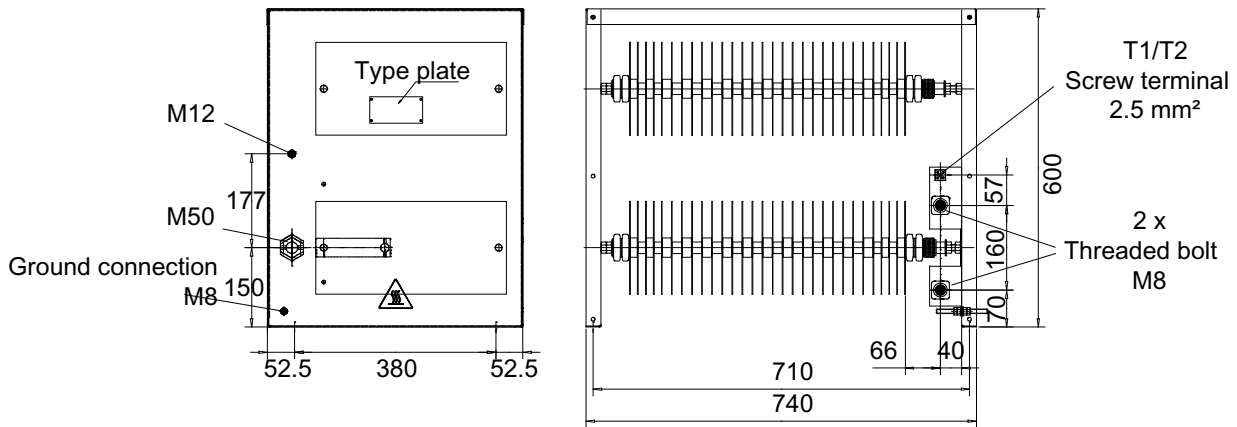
Dimension drawing for braking resistor (25 kW)
